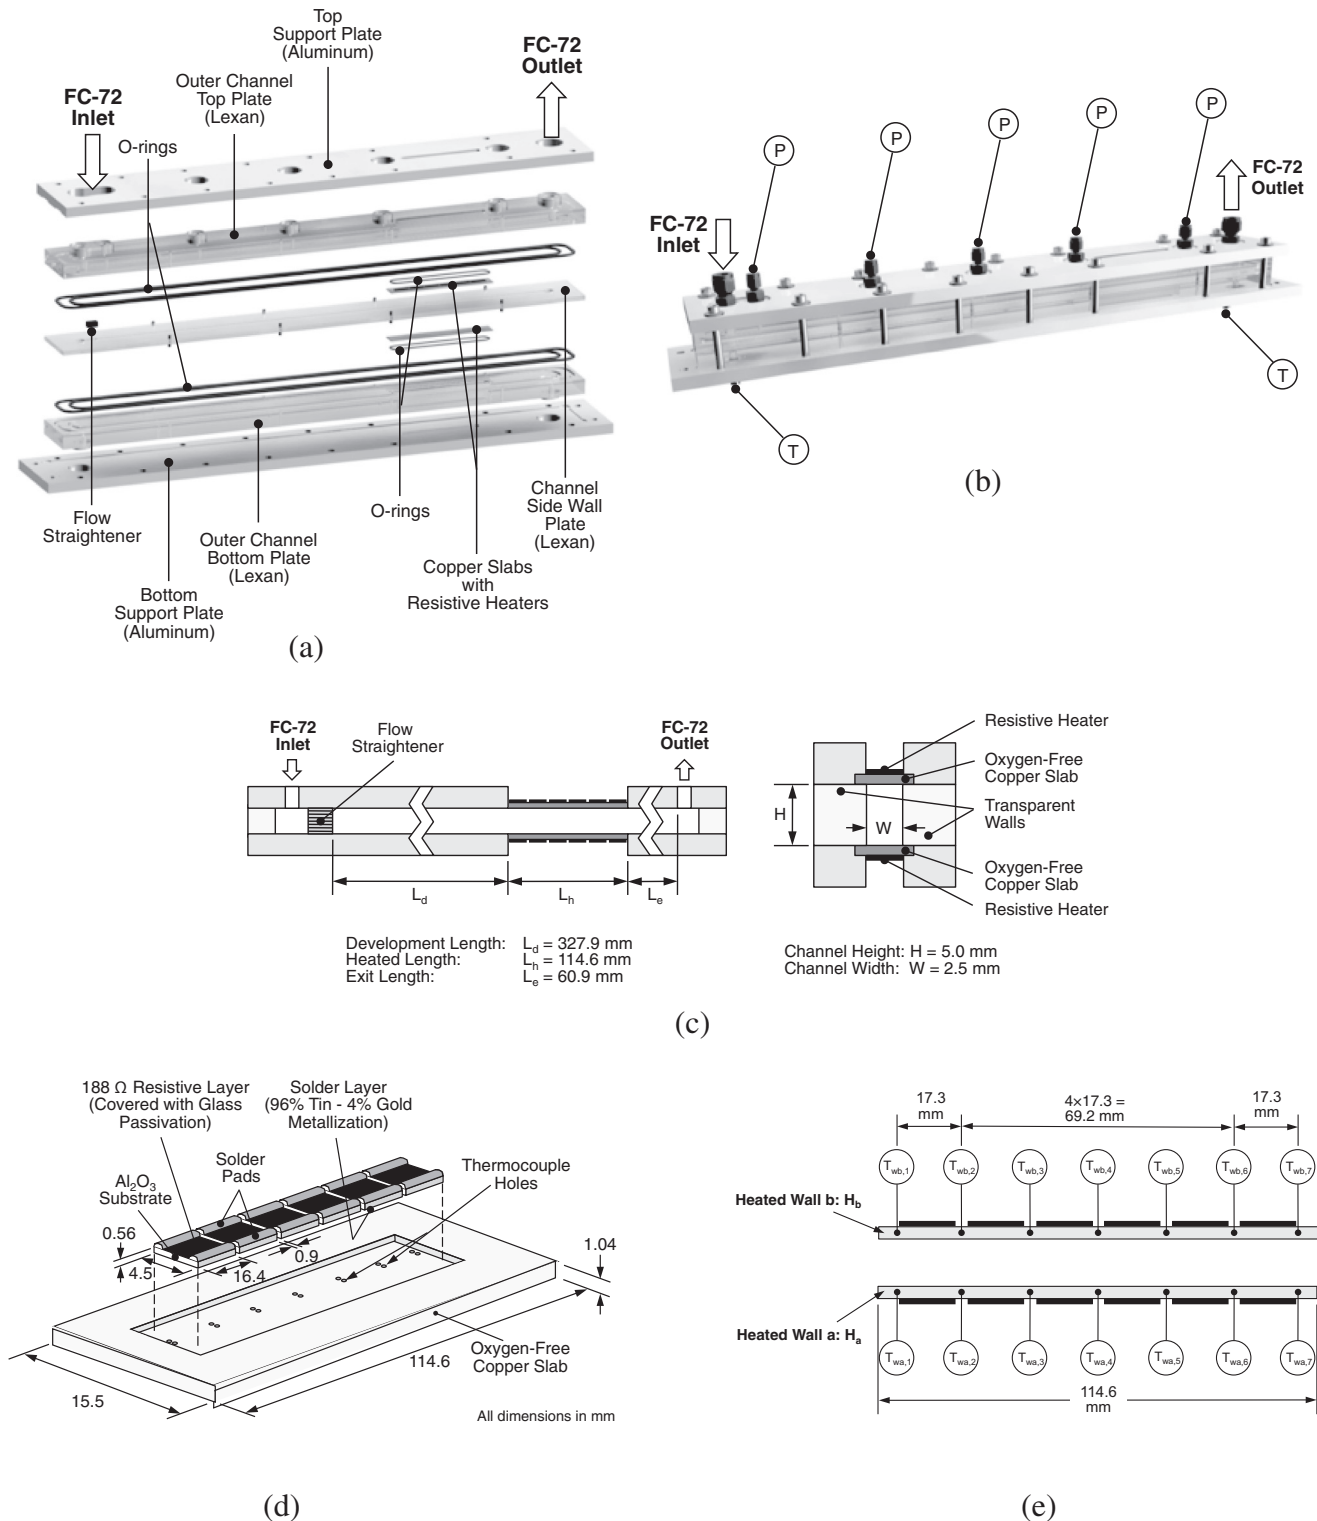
(a) Exploded view of flow boiling module. (b) Assembled view of flow boiling module. (c) Key dimensions of flow channel. (d) Construction of heated walls and thick-film resistors. (e) Thermocouple layout in two heated walls.
